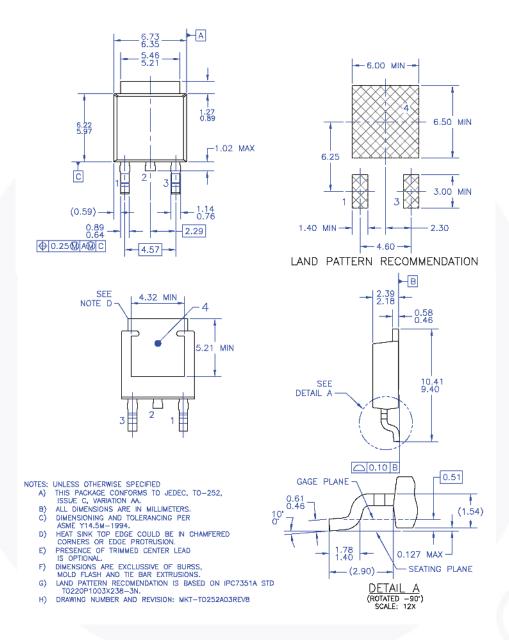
TO252 (D-PAK), Molded, 3-Lead, Option AA&AB
